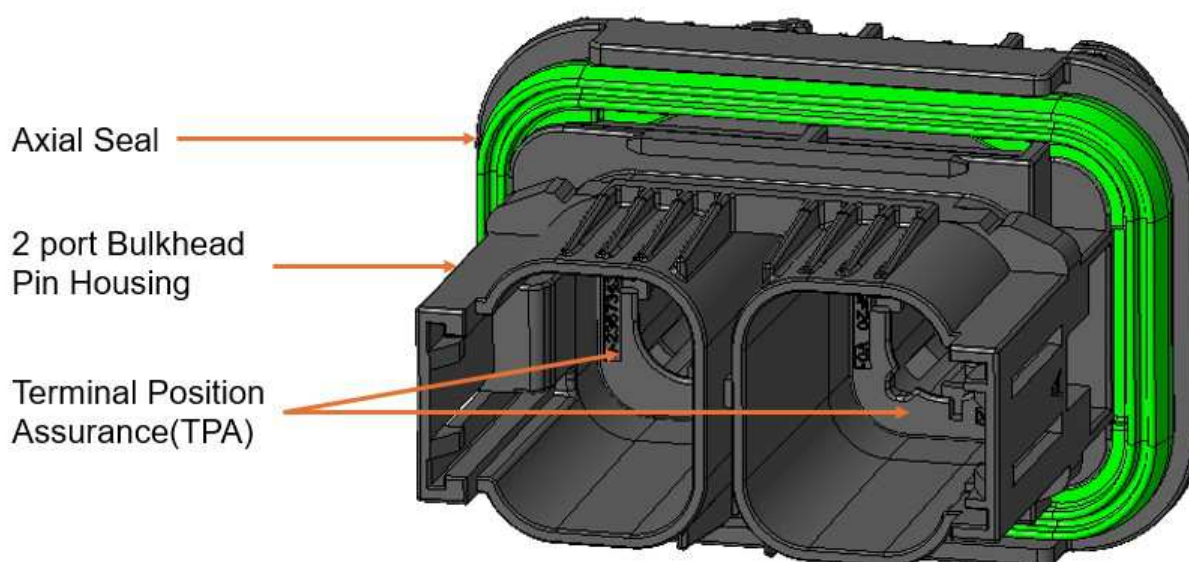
c: DT Highspeed 2 port Bulkhead Pin Assembly
